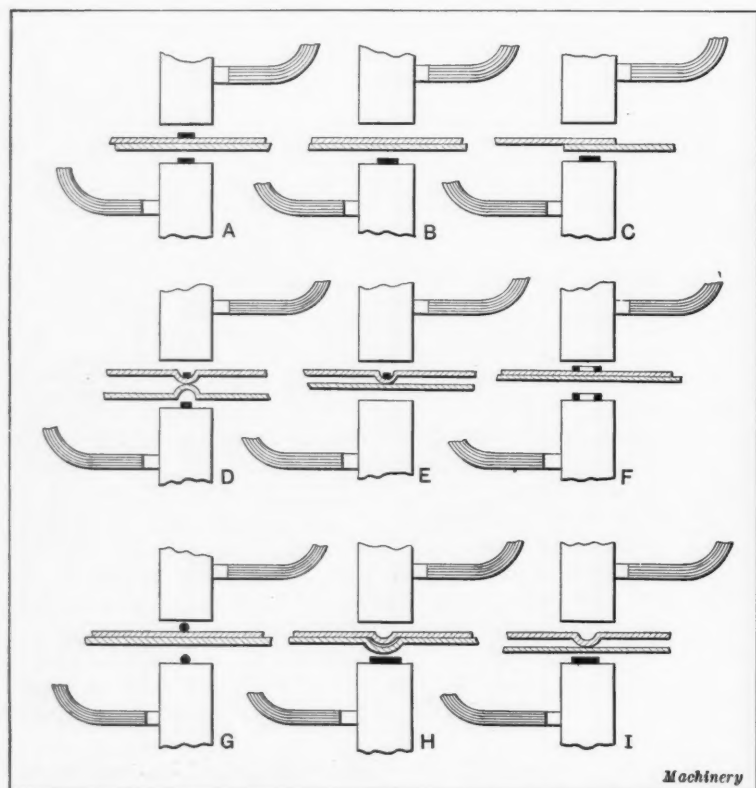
Diagram illustrating Various Processes employed in welding Two Sheets of Steel by means of Buttons
